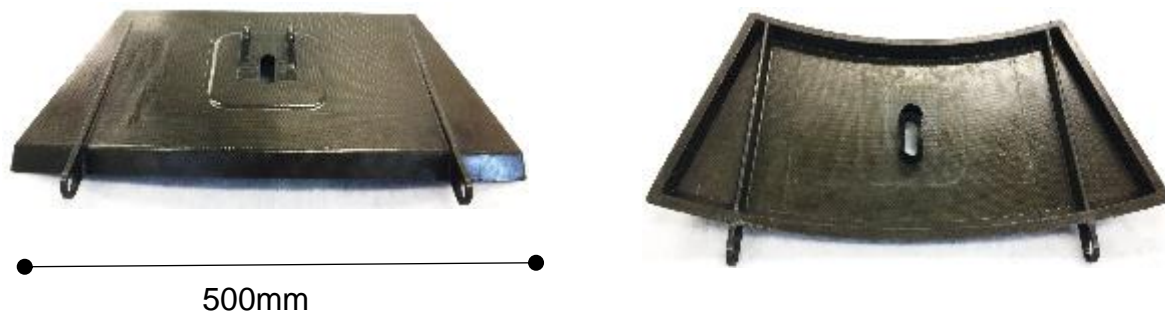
Left: front and rear views of the main moulding of an early (1989) RTM production component (the full assembly consisted of this moulding and a second RTM moulding bonded around a honeycomb core).
